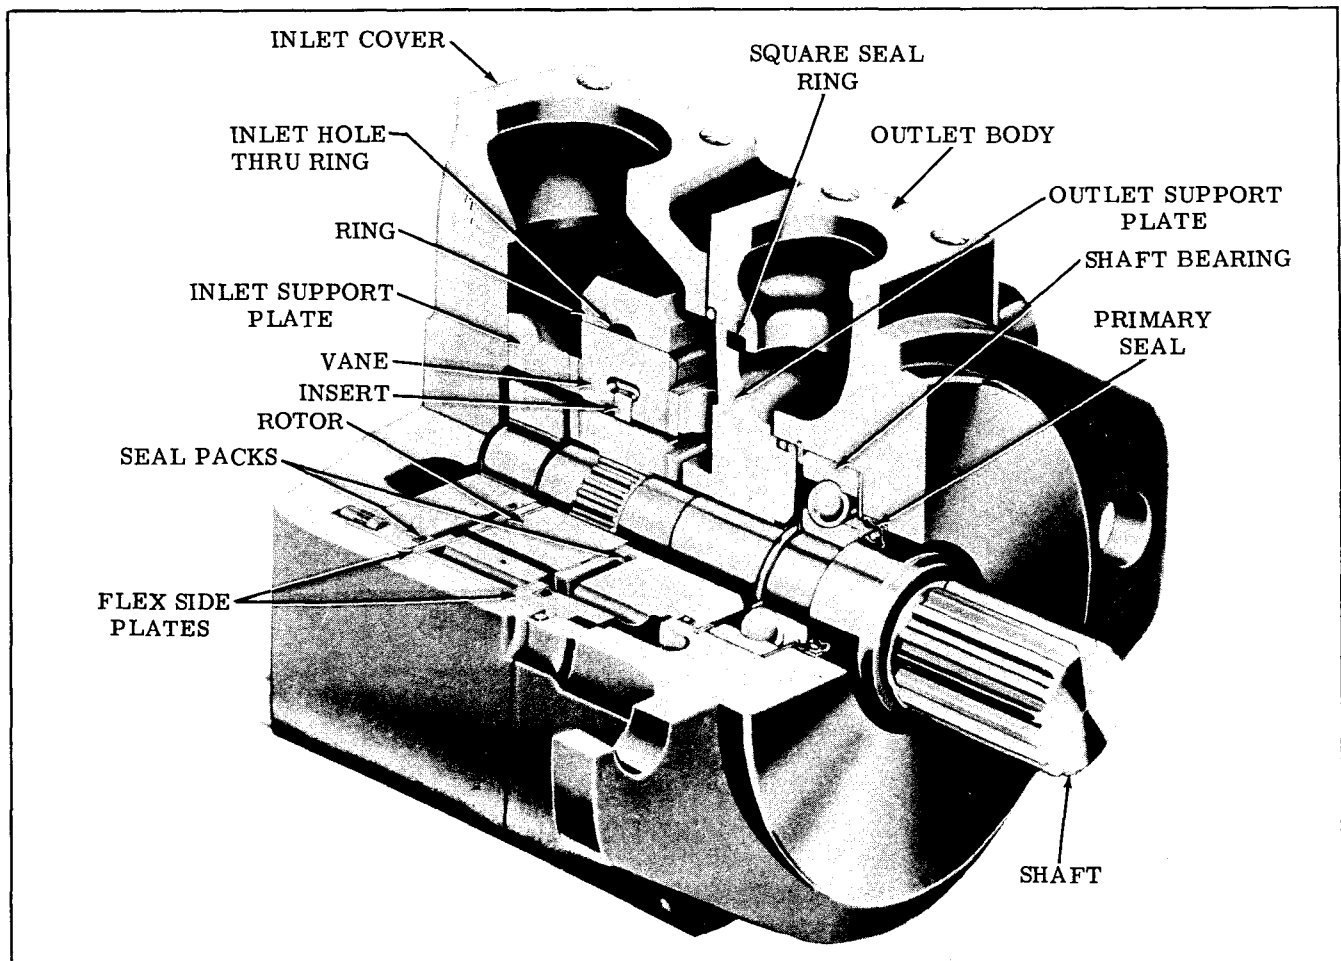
Cutaway View of Typical High Performance VQ, Single Pump
